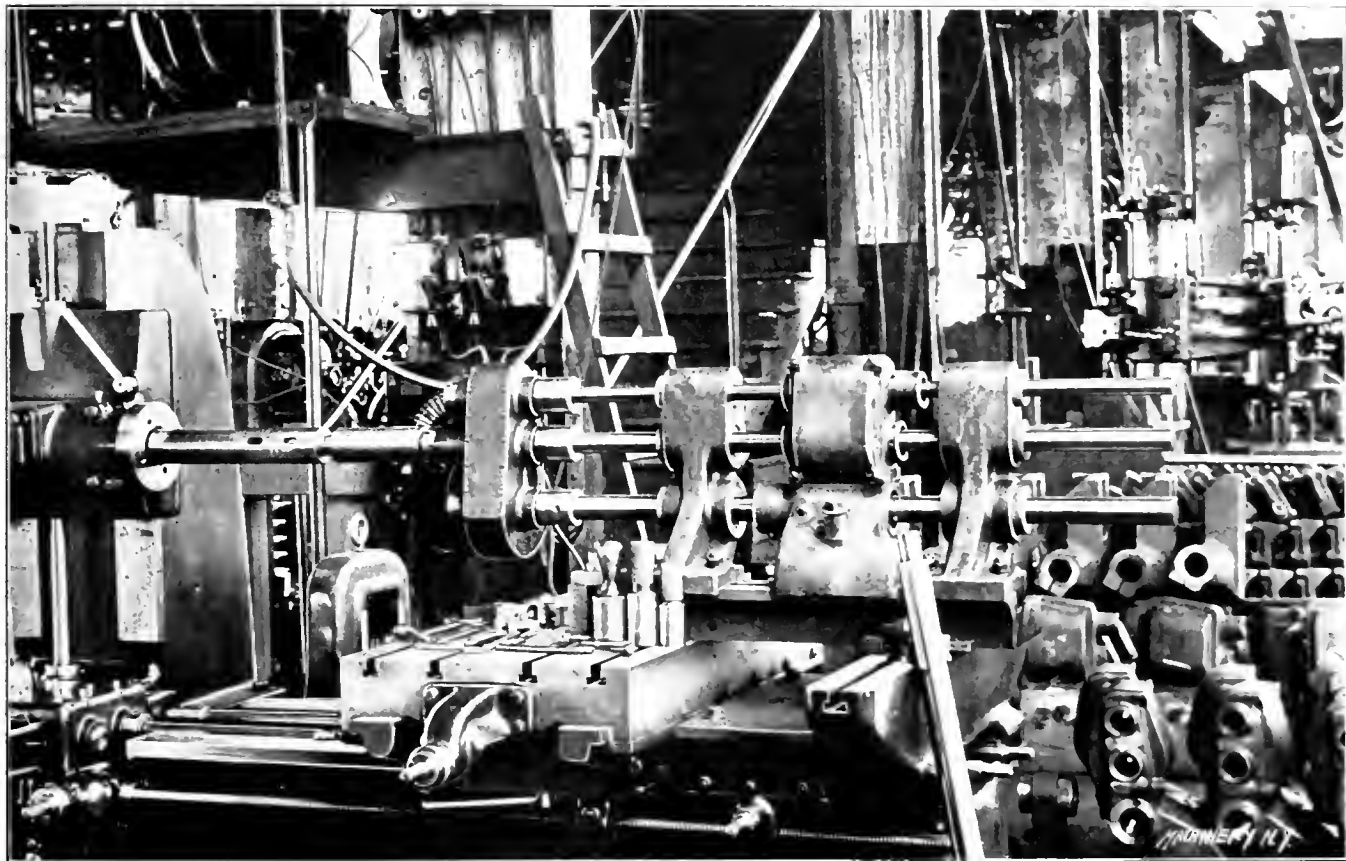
Lucas Boring Machine with Special Head for Driving Three Bars
